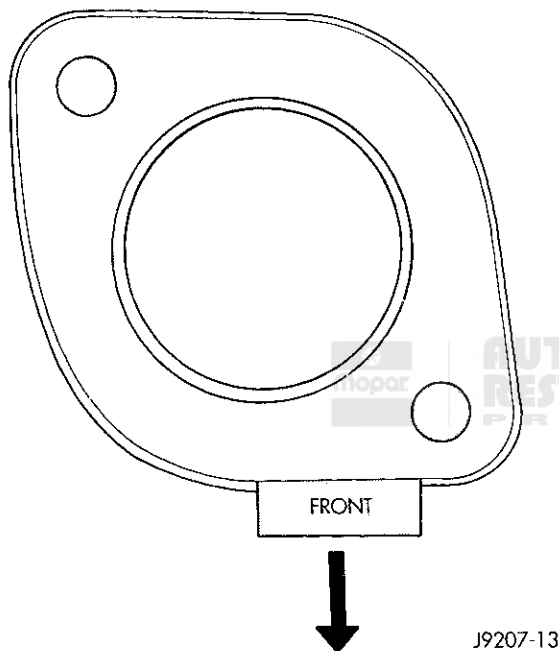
Thermostat Position—3.9L V-6 or 5.2/5.9L V-8 Gas Engines
